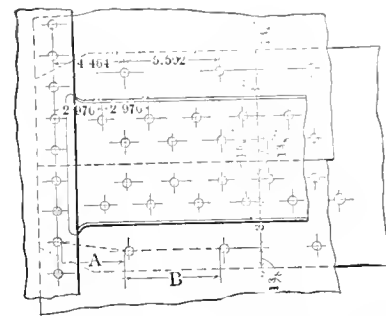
DETAIL OF SEAM SHOWN IN FIG. 52.
